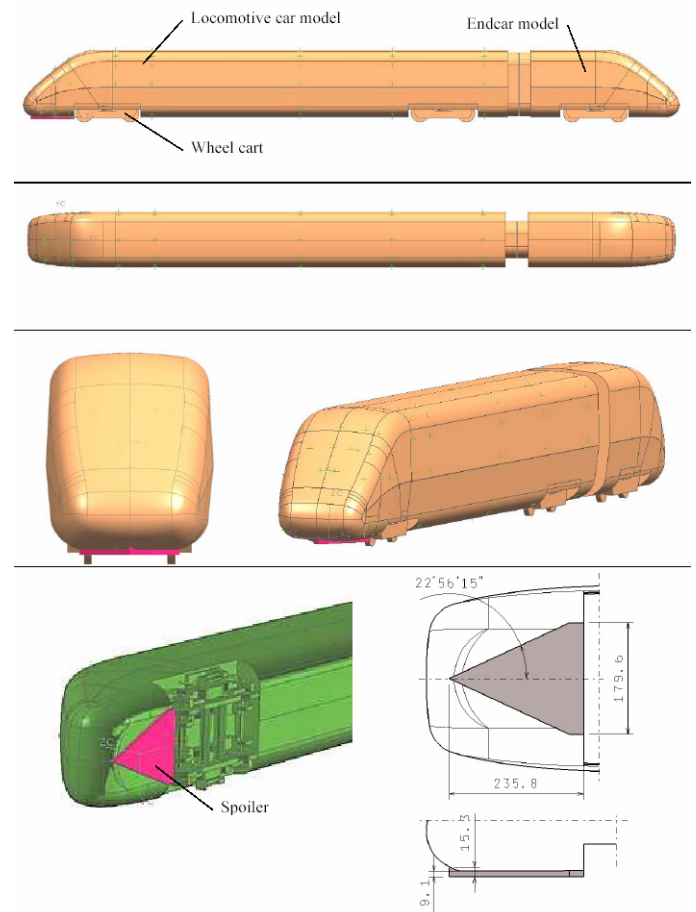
Leading and end car model (ATM) with removable bogies and front spoiler
